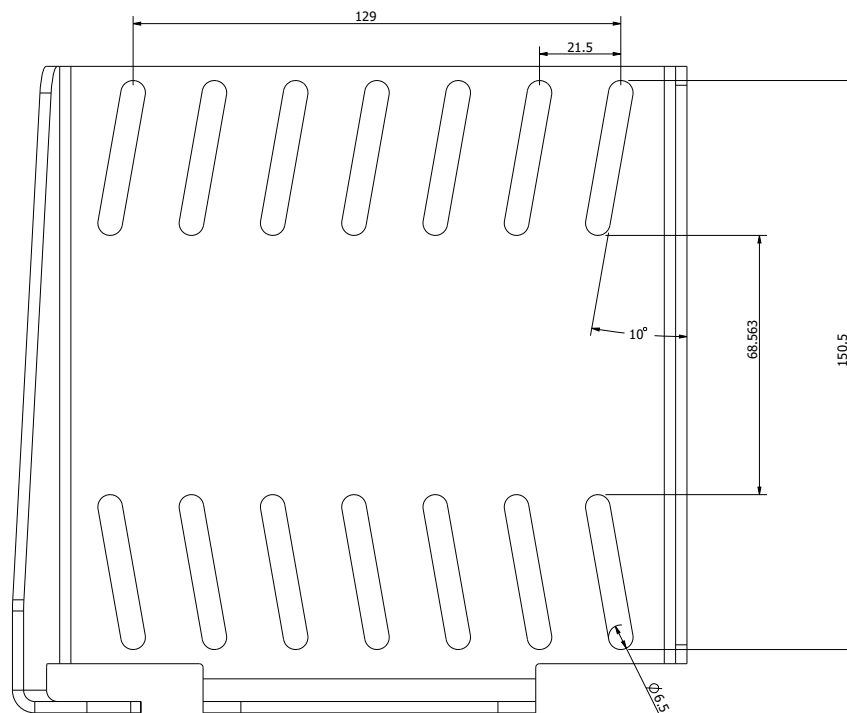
Mounting place for BUC bracket A on Ku feed assembly.
